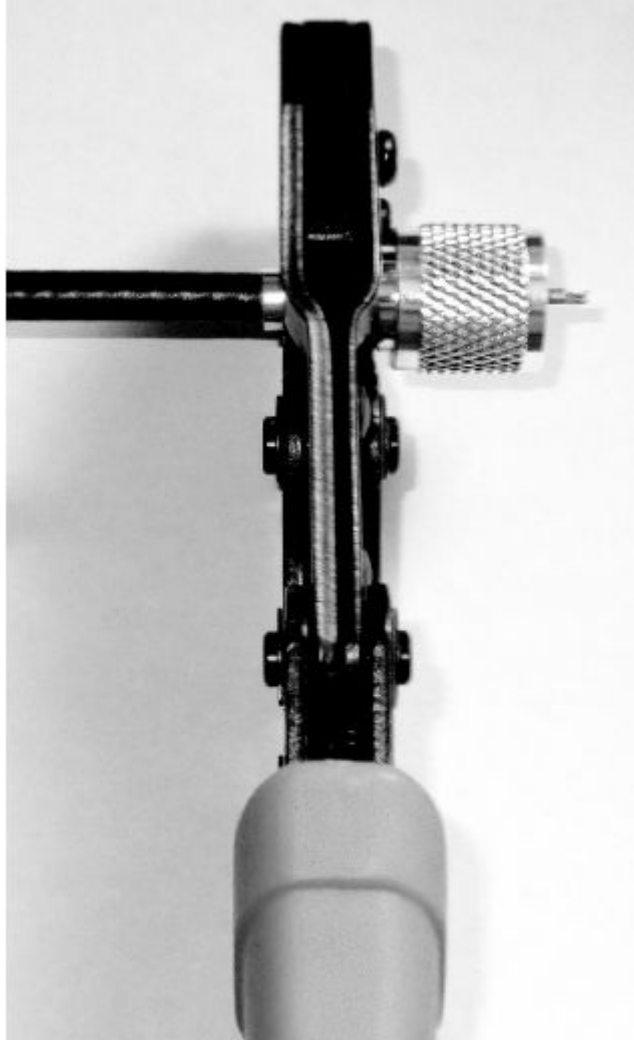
Proper placement of the ferrule on the cable and in the crimping tool before beginning the crimp. The crimping tool is against the back of the connector body. You can see the center conductor extending from the center pin.
